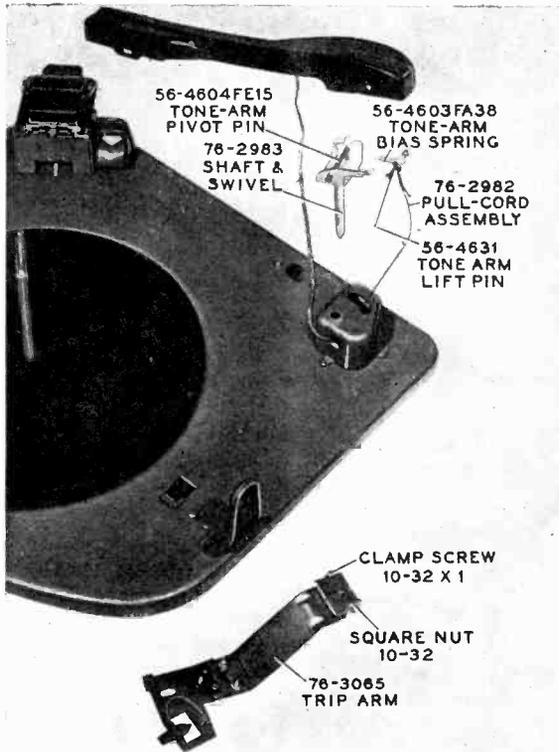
TONE ARM AND TRIP ARM, REMOVED TP-4132
